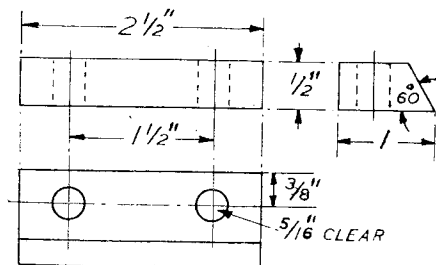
Clamping strips. 2 off, steel or cast-iron
